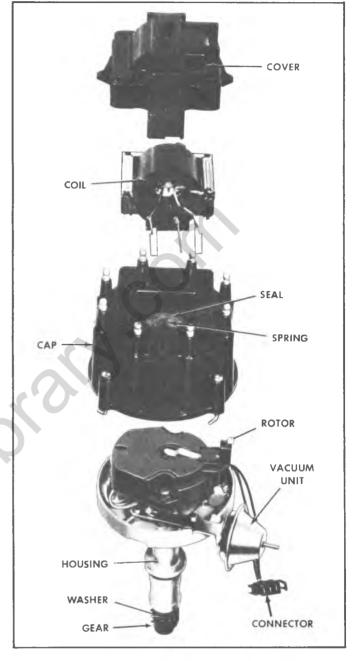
Exploded View of 8 Cylinder HEI Distributor
